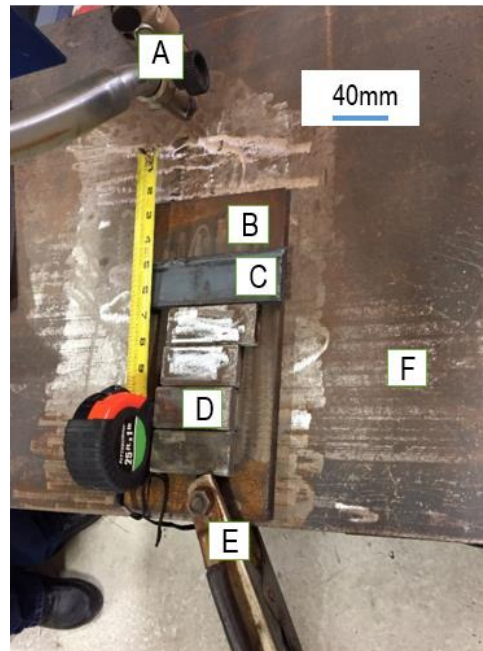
Calibration setup. (A) Welding head (B) Substrate (C) Dummy piece
